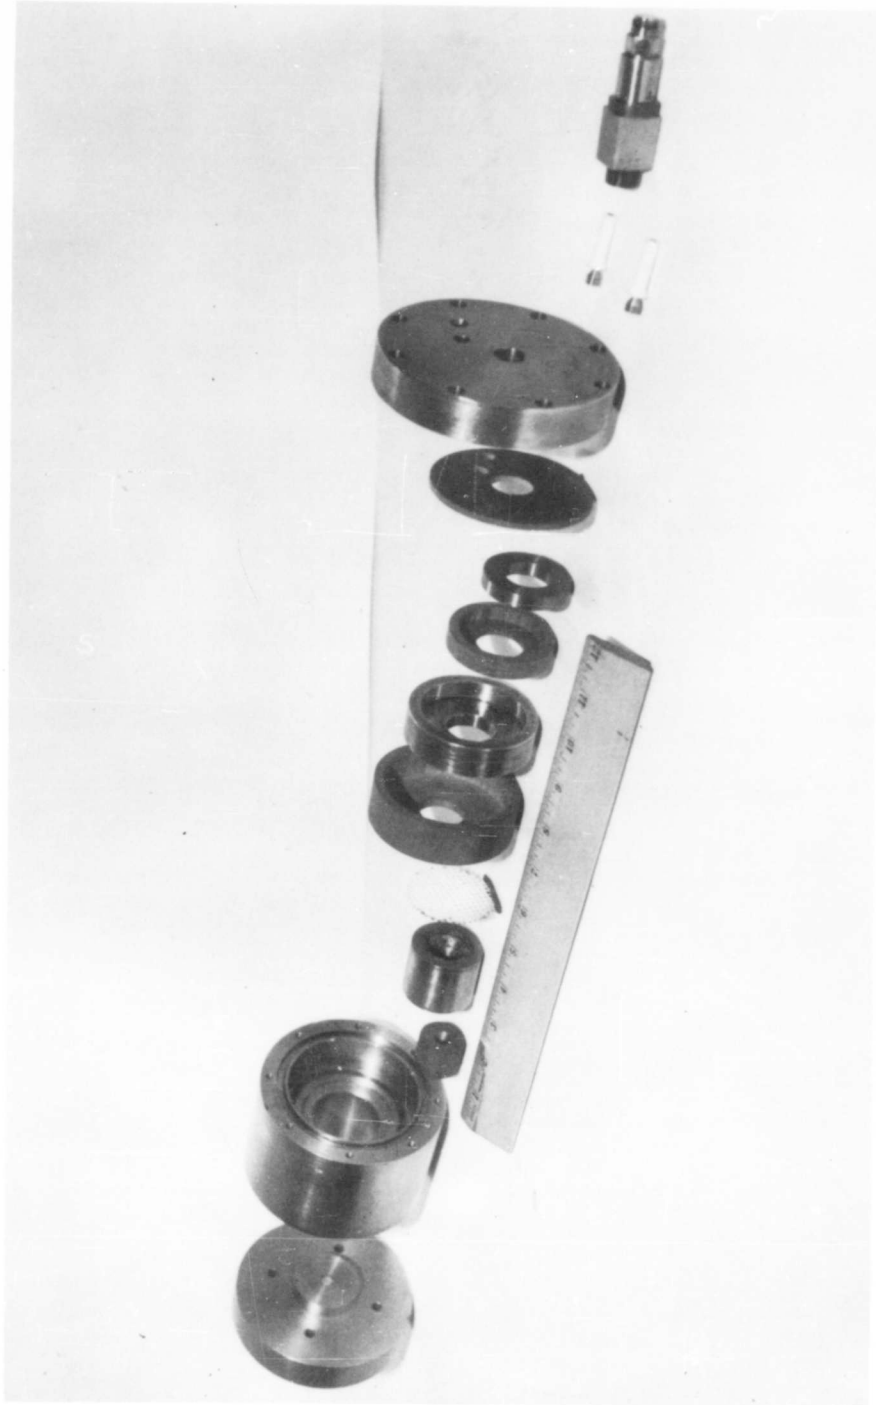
AN EXPLODED-VIEW PHOTOGRAPH OF THE "HI-LO" IGNITER
